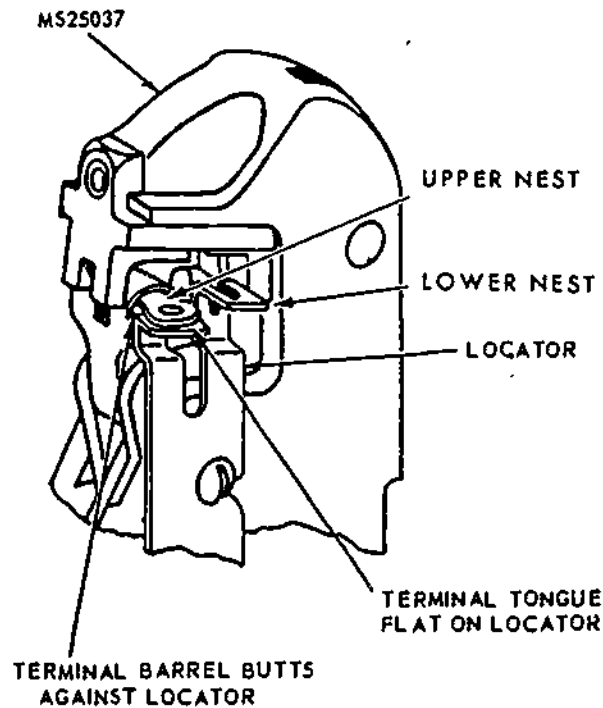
Insertion of Terminal Lug Into Crimping Tool.
